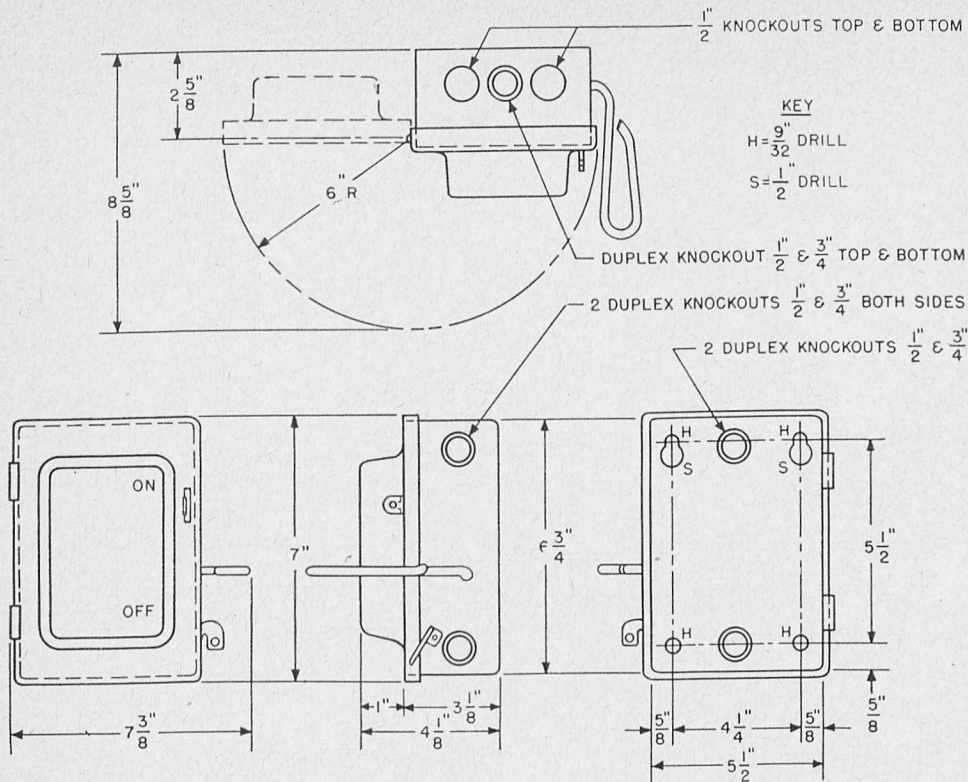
Switch Box SA-284/SPN-11, dimensional drawing.
